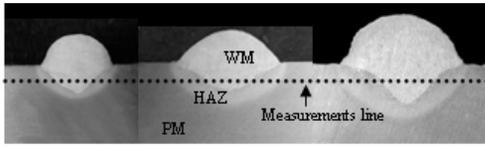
Optical macrographs through welded section of Sample 2 showing: parent metal, PM, weld metal, WM, and heat affected zone, HAZ
